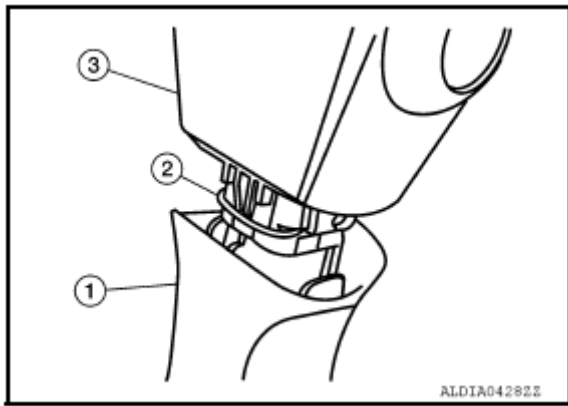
Identifying Shift Selector, Knob Cover And Lock Pin
